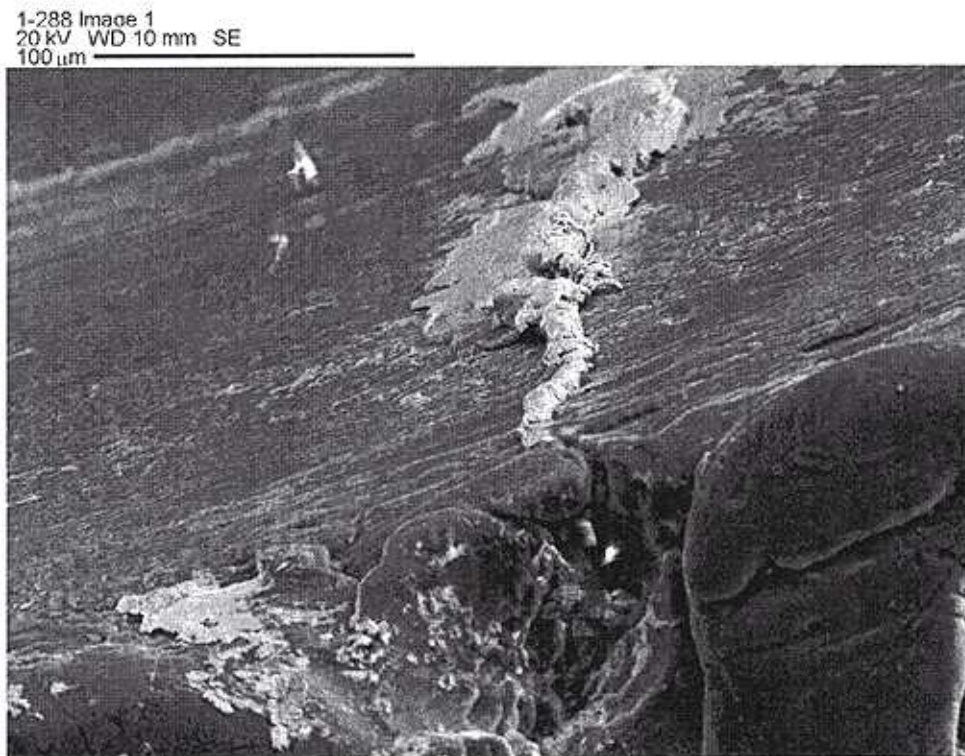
288 Hole 1 SEM image of the hole surface with material extruded from the crack
